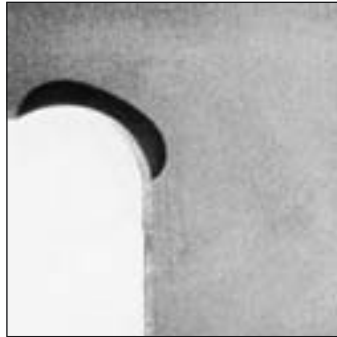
Raceway of a supporting ring in a double-row ball bearing slewing ring.
